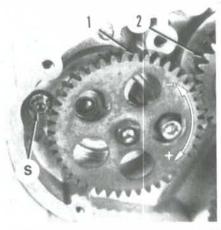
To adjust backlash between oil pump drive gear (1) and crankshaft gear (2), loosen pump mounting screws and rotate pump in crankcase. Note position of small head pump mounting screw (S).
